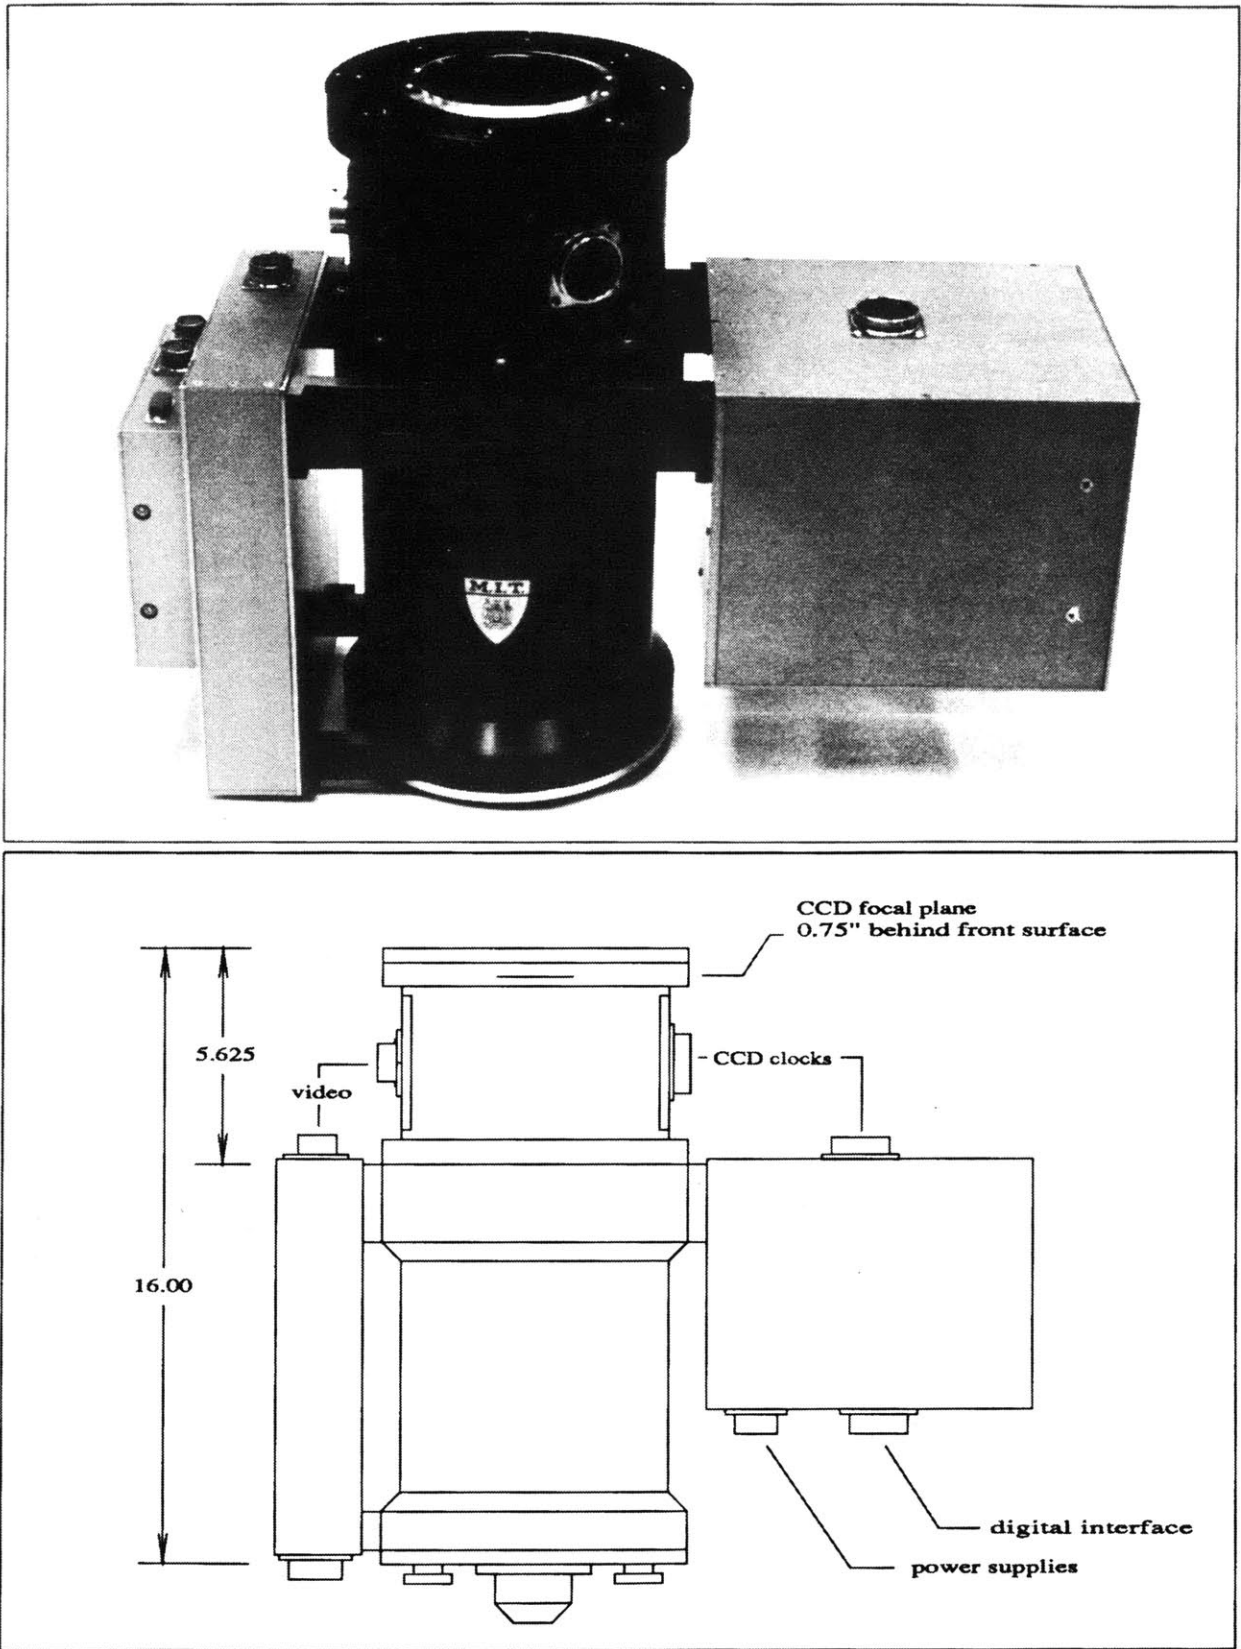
Drawing and photograph showing an external view of the dewar and electronics boxes.
